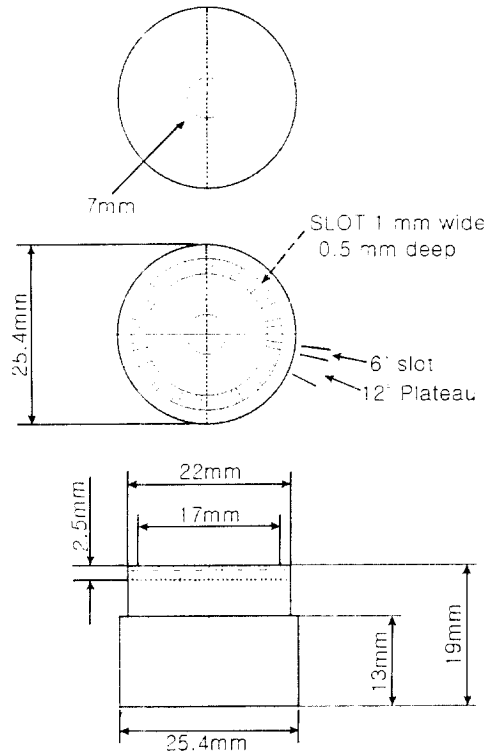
Details of Multiple Crevice Assembly (MCA)⁵⁾. The test specimen places between serrated parts of MCA washer to form crevice.
